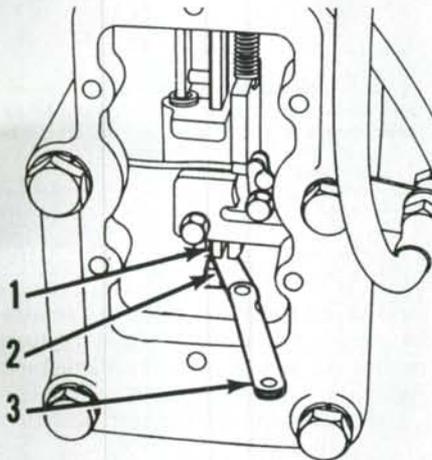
Insert 0.05 mm (0.002 inch) feeler gage (3) between push rod (1) and rocker lever (2), then turn connecting link adjusting nut until feeler gage is snug but can still be moved.
